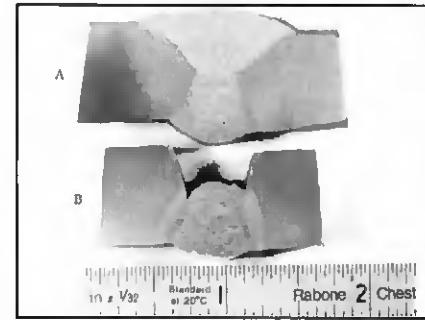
Cross sections of completed welds produced by MRF welding in 17.5-mm-thick steel. Plates assembled with root opening of 6.4 mm and misalignment. A — MA = 4.8 mm; B — MA = 2.4 mm.
